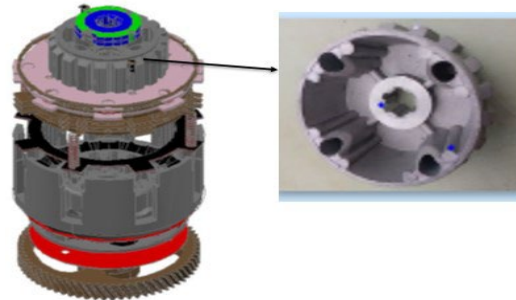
The CY 80 motorcycle Clutch hub assembly
